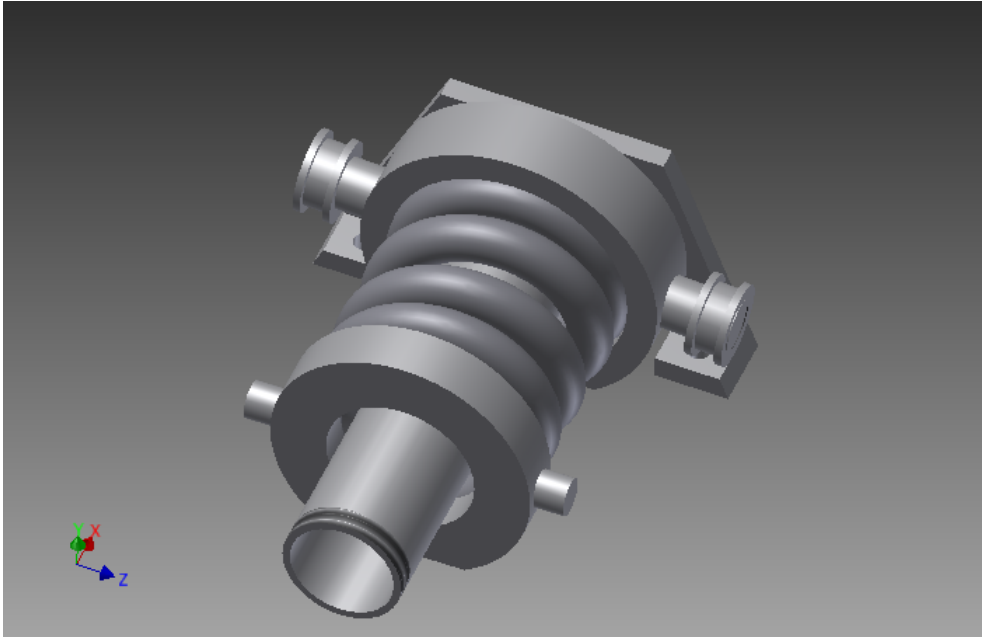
The spring that is placed over the motor-ball screw connection.
